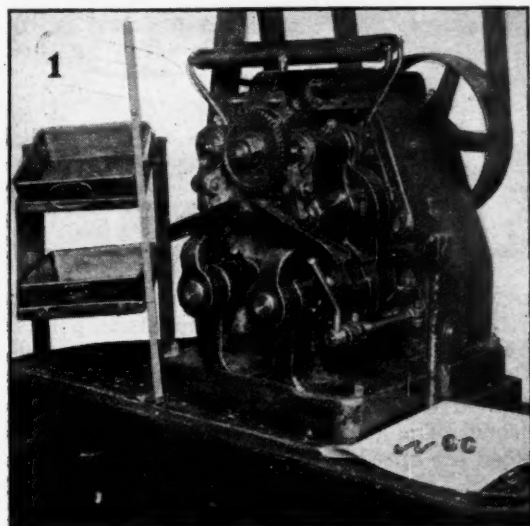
Special machine for cutting hex or square heads. Machine is capable of turning out 20 pieces per minute, cutting on one side while loading on the other. Two sample pieces, one with a hex head and the other with a square head, are shown adjacent to the machine. The guard plate in front of the cutter is removed. Fig. 2—Another view of the machine for cutting hex and square heads. Note the spring on top of the machine for keeping the swinging arm cam in contact with the hardened block on the machine, as described in the text. Fig. 3—Bank of five machines specially designed for cutting slots in Zenith carburetor shaft. Fig. 4—Machines replaced by special machine for cutting slots in Zenith carburetor throttle shaft. These machines must be brought into position by hand rotation. On the improved machines the automatic arrangement quickly brings the table into position, after which the slow feed comes into control.
